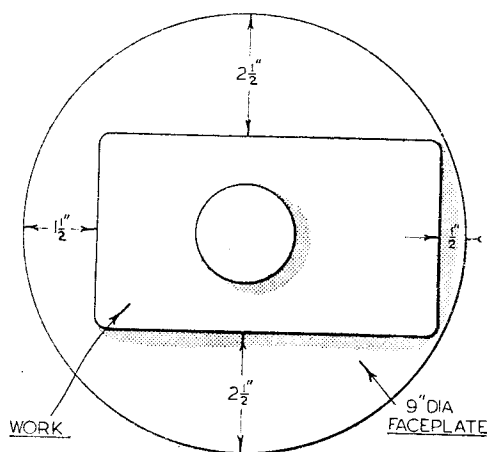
A work-piece for mounting on the faceplate to machine the boss
